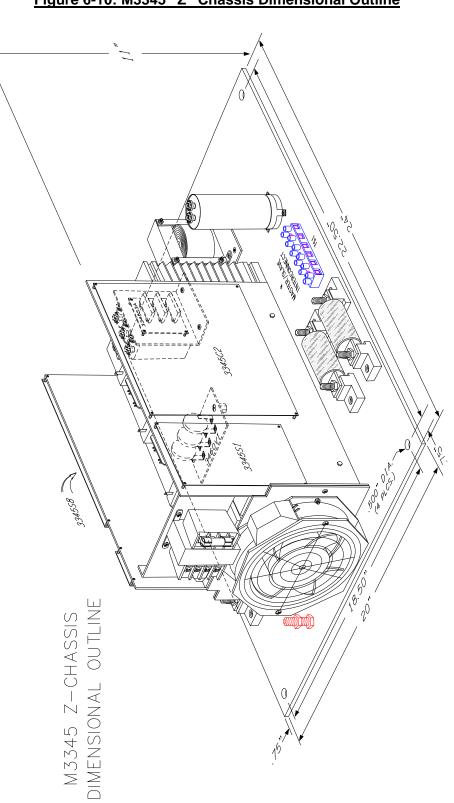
M3345 "Z" Chassis Dimensional Outline
